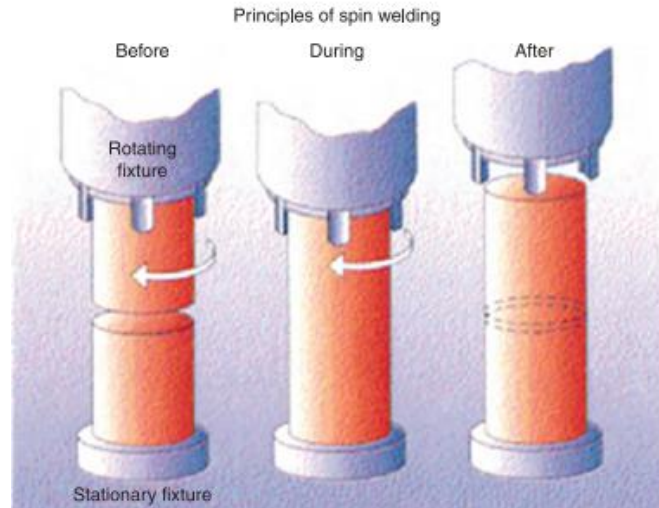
Schematic of spin welding of plastics [12].
